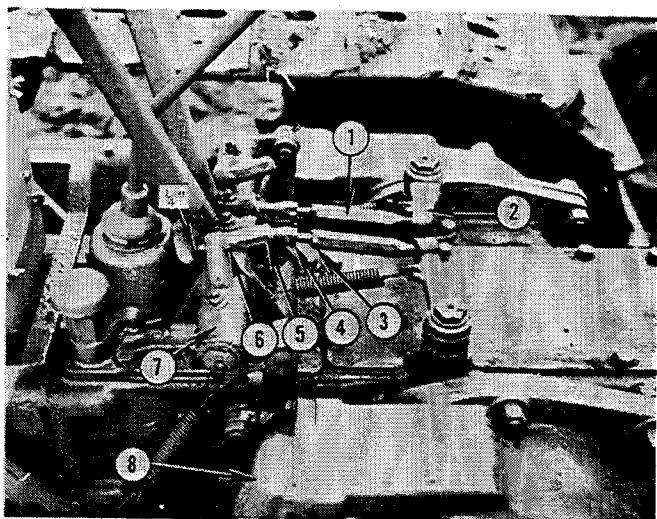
STEERING LINKAGE ADJUSTMENT
